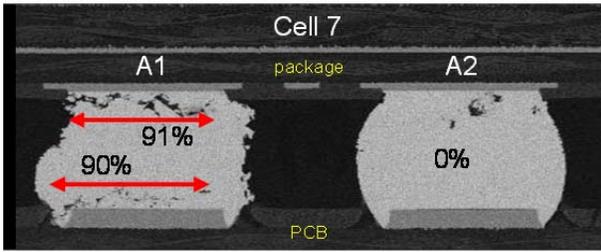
Cross-section of corner solder-joint A1 and neighbor A2 from 292MAPBGA cell 7 (large 11mil die with SAC387 ball) after 3000 cycles. The corner solder-joint was distorted and had significant cracking at both the package and PCB sides, but the neighbor had no appreciable damage.
